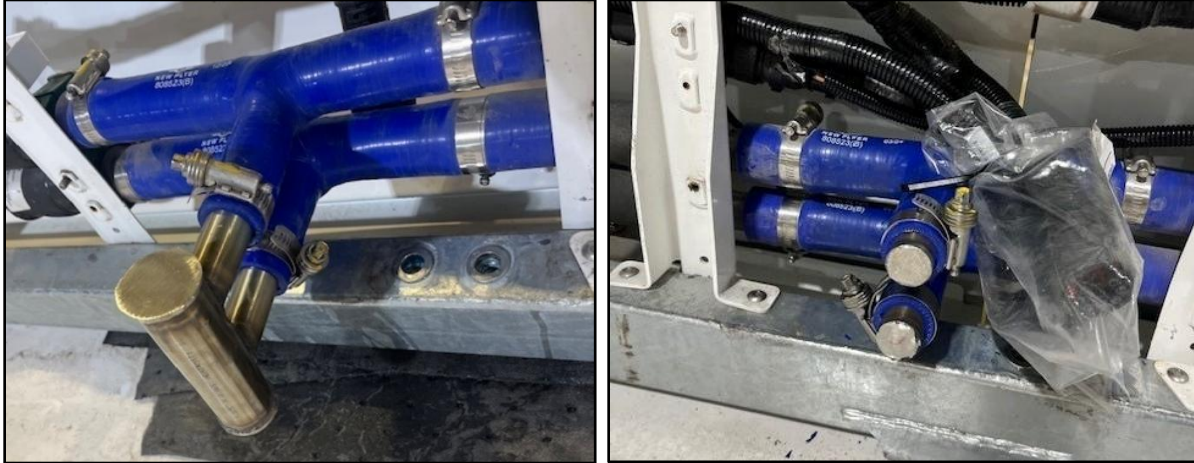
Install U-Shaped Plugs and Clamp on Coolant Hose
